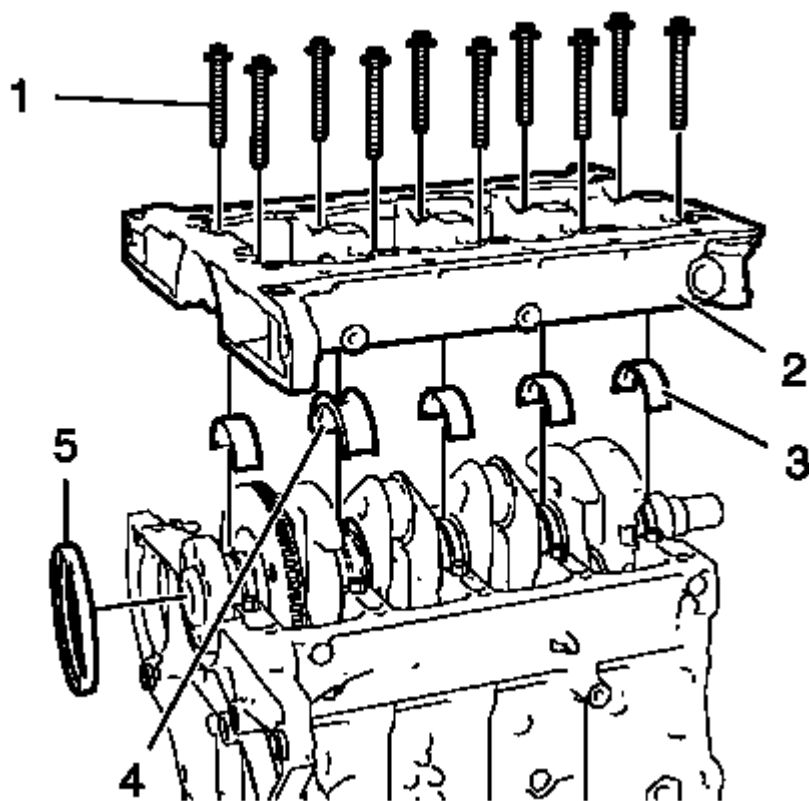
Crankshaft Bearing Cap Tie Plate, Bolts, Lower Crankshaft Bearings, Lower Crankshaft Thrust Bearing And Crankshaft Rear Oil Seal
